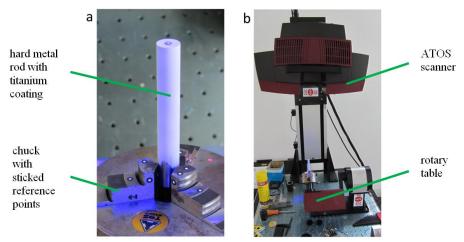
Configuration of equipment used in experiment; (a) hard metal rod coated with titanium powder clamped in chuck; (b) ATOS scanner and rotary table with chuck and measured rod
